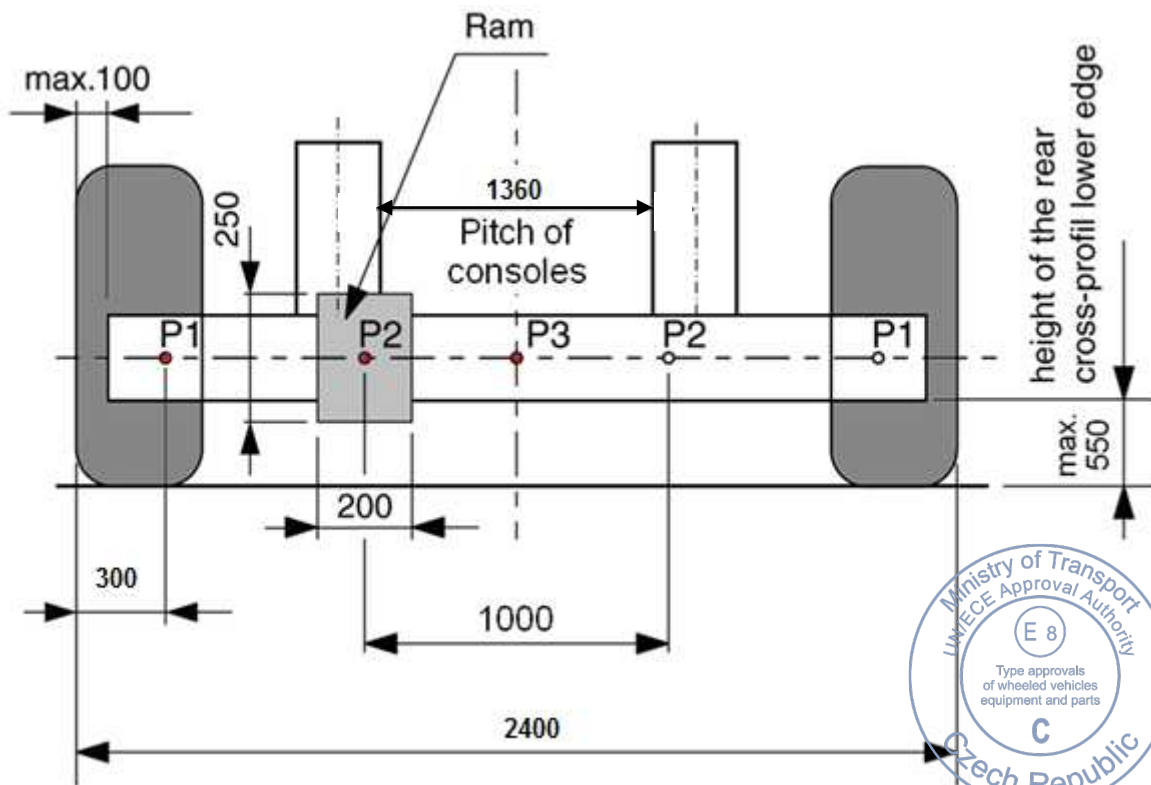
Loading points on the rear underrun protection device (pitch of consoles is 1360 mm) – TEST 2
